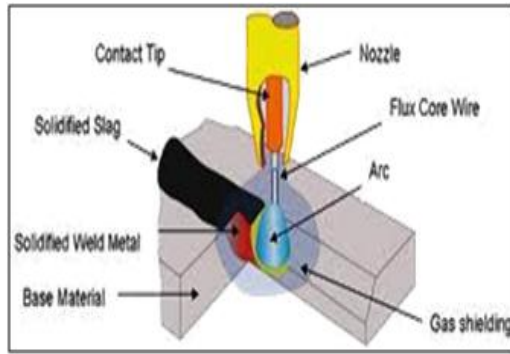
Flux Cored Arc Welding (FCAW)
